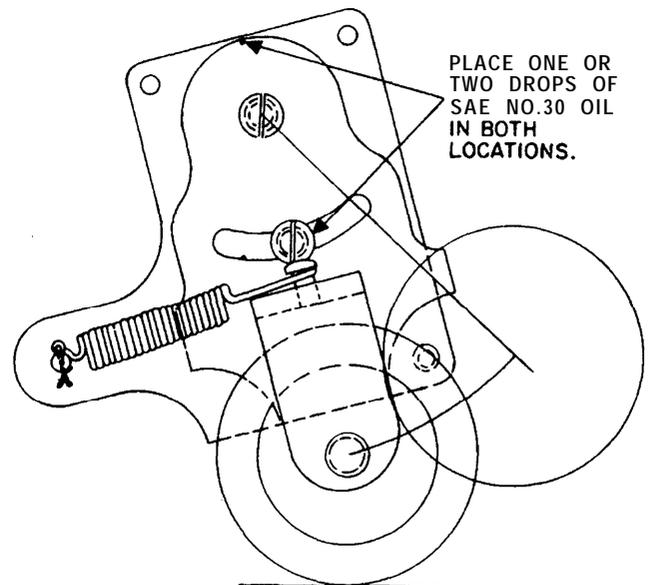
Lubrication of Pivot Mounted Wheel Assembly.
